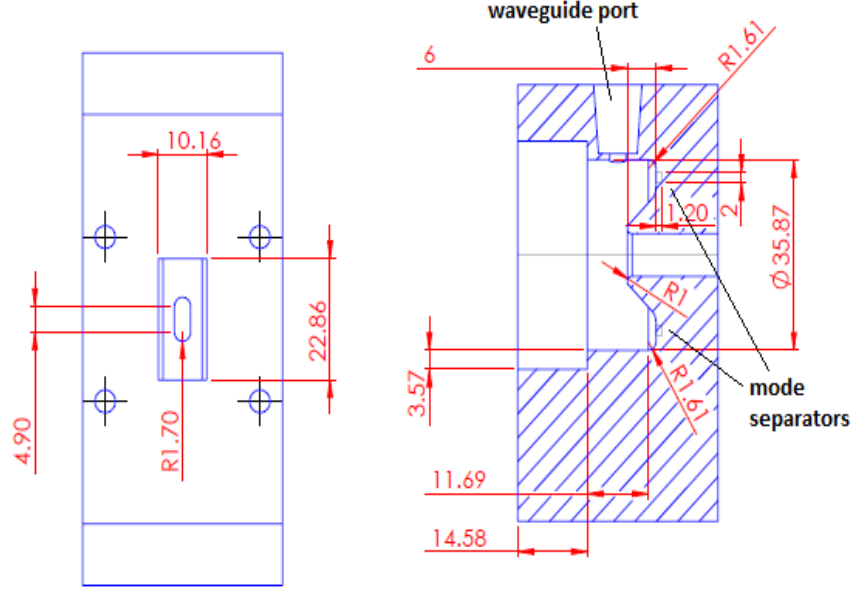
Nose cone CAD drawing of Part 1 with dimensions in [mm]
